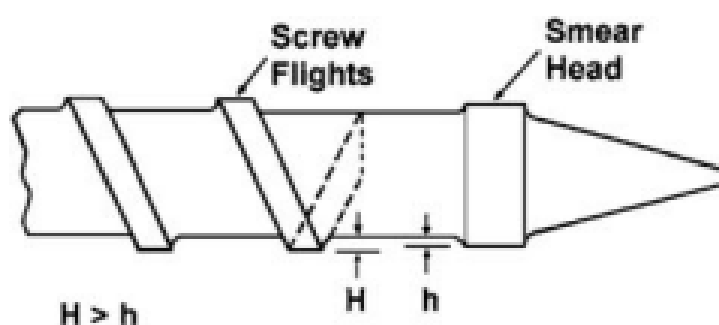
A smear head design (Ebnesajjad & Khaladkar 2017)
